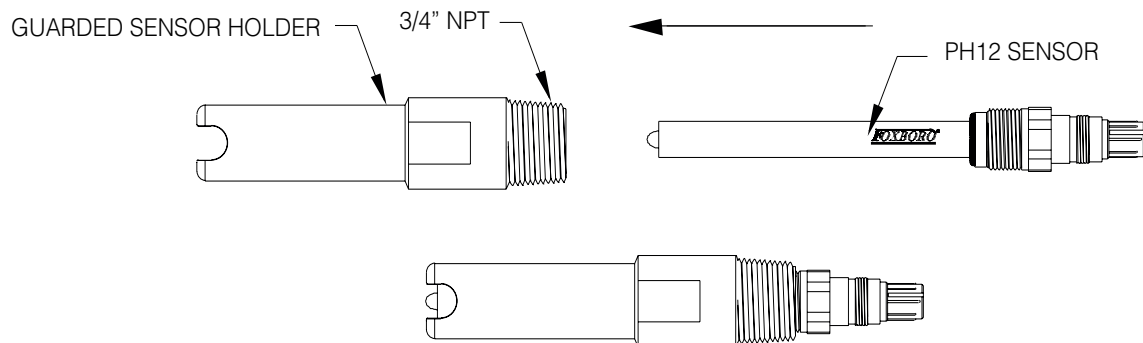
Installing PH12 Sensor into Guarded Sensor Holder
